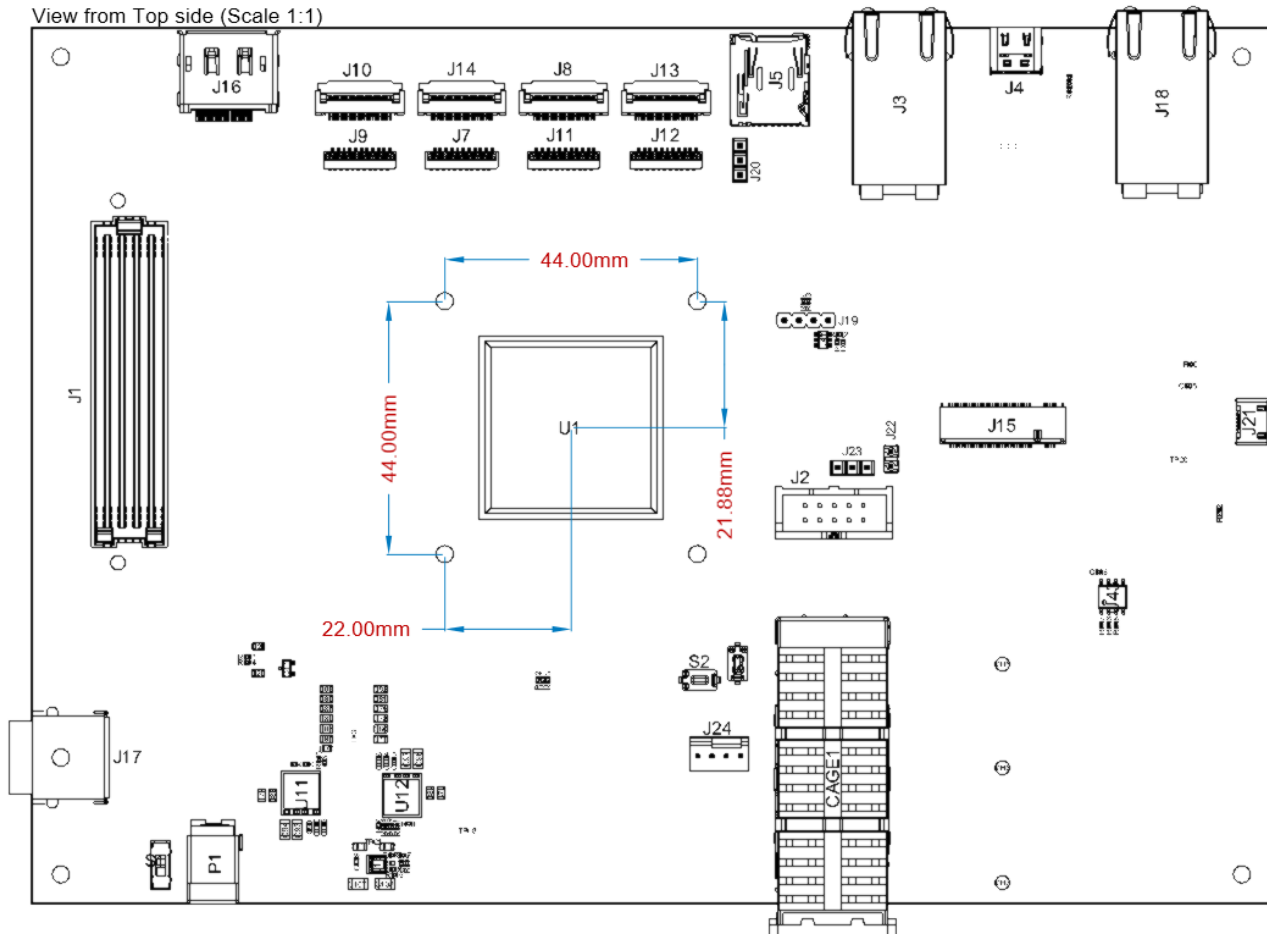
3 "New" Heatsink Mounting Hole Dimensions
